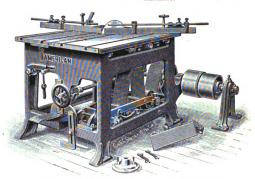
No. 71/2 Combination Saw and Dado Machine.
